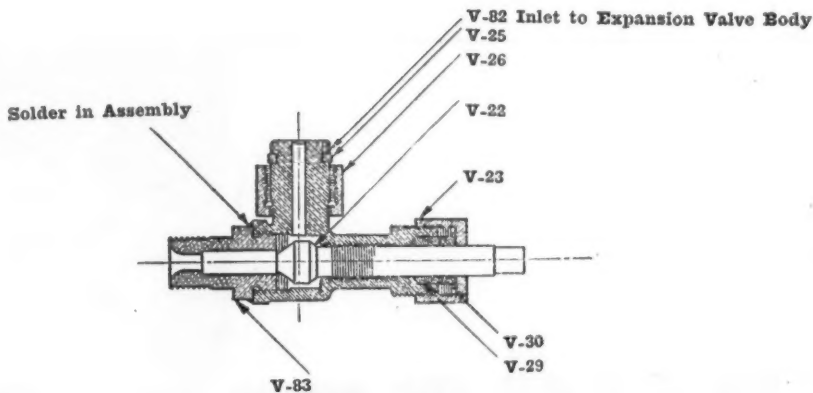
Valve showing double seating stem, which was a feature of valves used in the Socold unit.
